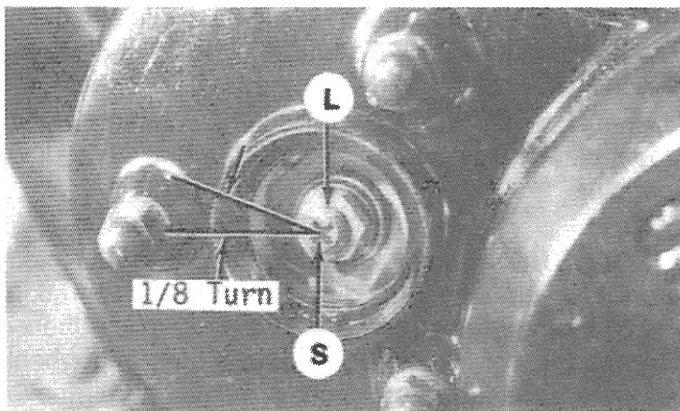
View of clutch adjuster screw (S) and locknut (L). Refer to text for adjustment procedures.
